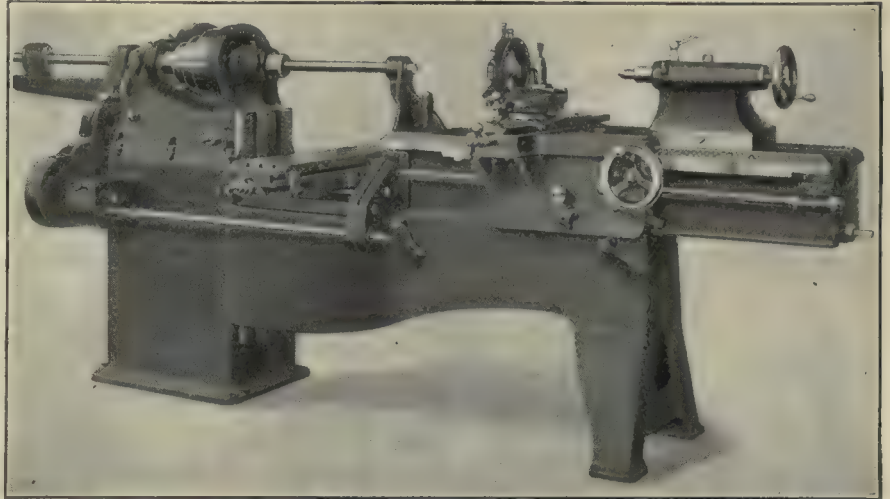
THE MACHINE WITH LATHE BED OPEN, SHOWING BORING AND MILLING POSSIBILITIES
